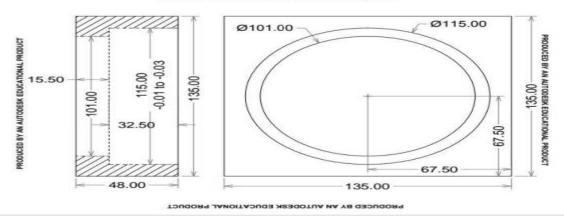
AutoCAD Drawing Of 110 mm Pin
